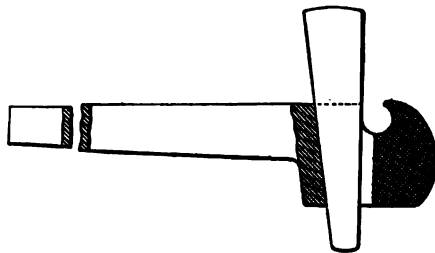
COTTER WRENCH FOR STUCK DRILLS.
